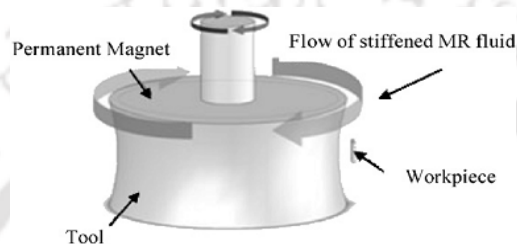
Schematic diagram of MR finishing tool assembly [80]
